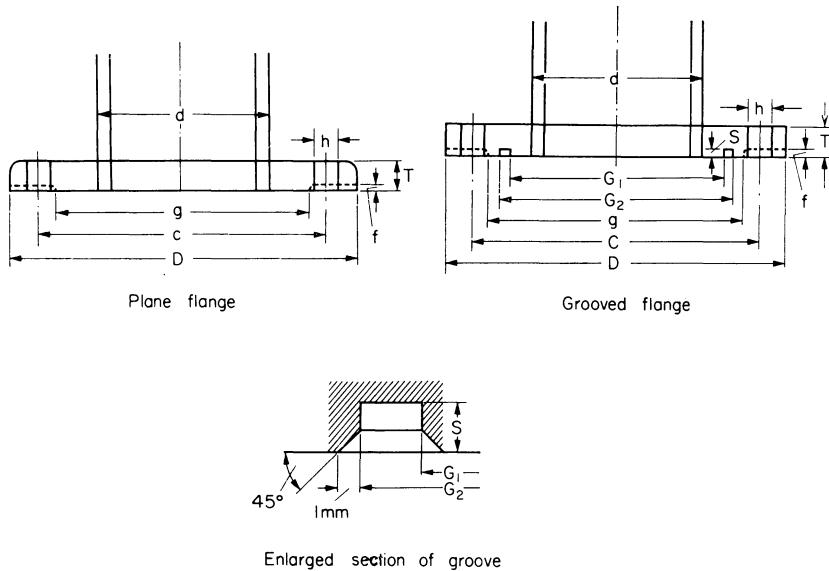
Dimensions of flanges for O-ring seals (see Table 3.35). After Kiyoshi⁶⁸³
